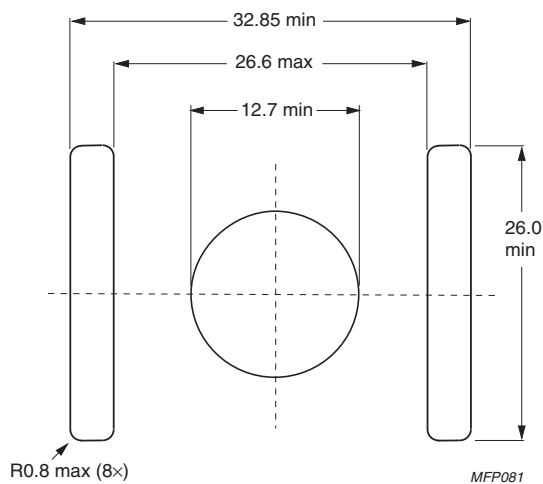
Recommended PCB cut-out for ER32/6/25 cores.
